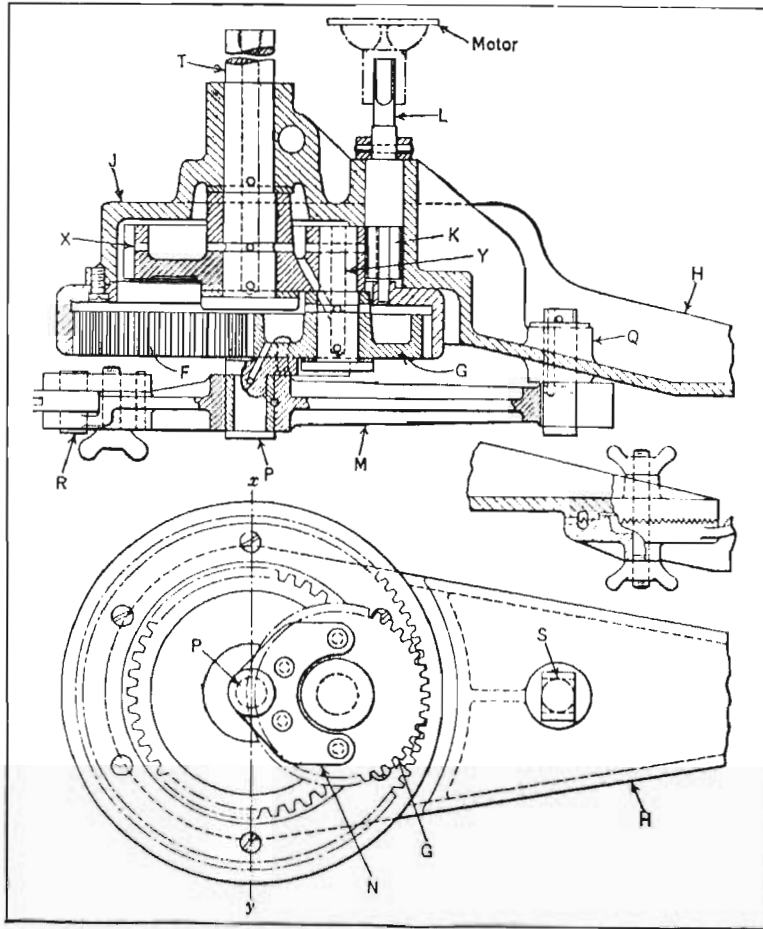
Cross-section and Plan Views of Saw-reciprocating Mechanism
